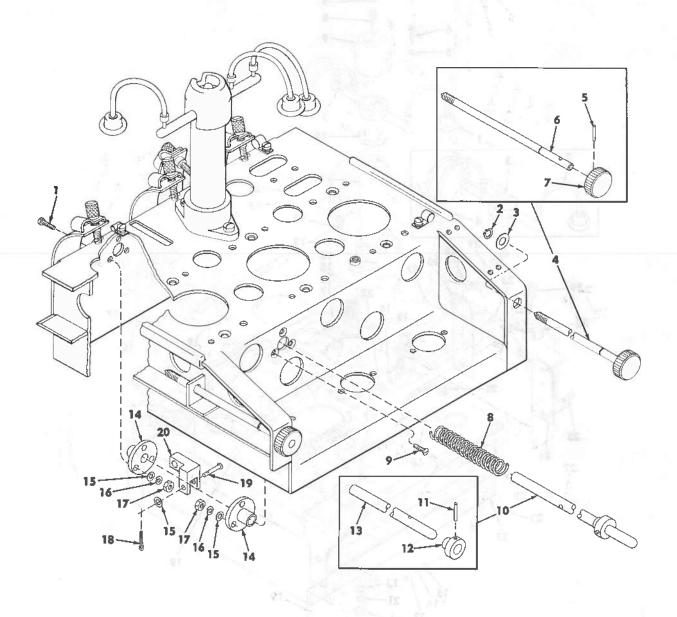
POWER SUPPLY SUBASSEMBLY /8520524/-PARTIAL EXPLODED VIEW
